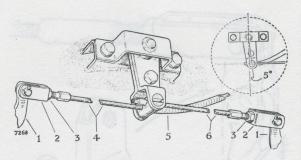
Compensating lever assembly mounted on the rear axle; note the 5° inclination of the compensating lever towards the side having the short cable. Right-hand drive shown, left-hand drive symmetrically opposite
